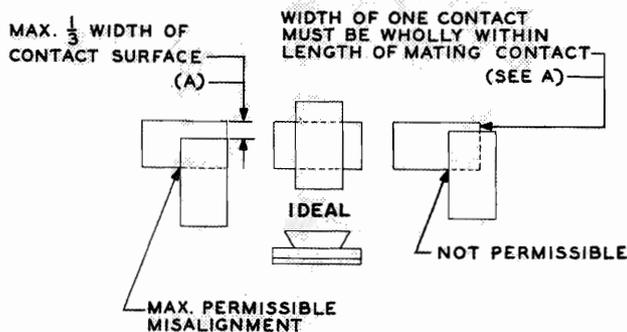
Alignment of Contact Surfaces — Heavy Contacts
